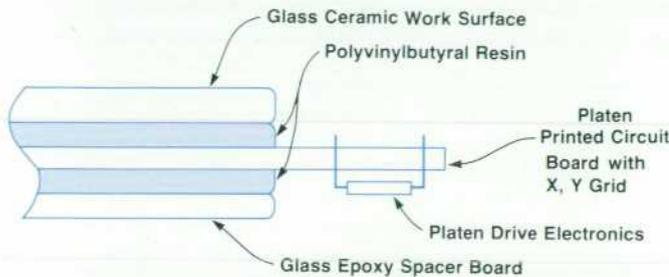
Cross-section of platen printed circuit board assembly. The ceramic work surface provides a durable layer that resists scratching and is dimensionally stable.
